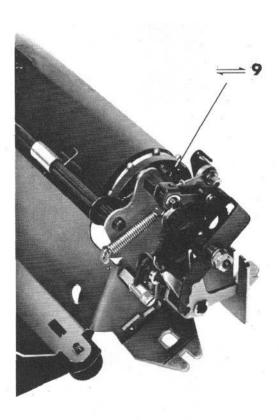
ADDITIONAL LUBRICATION - SPROCKET PLATEN
